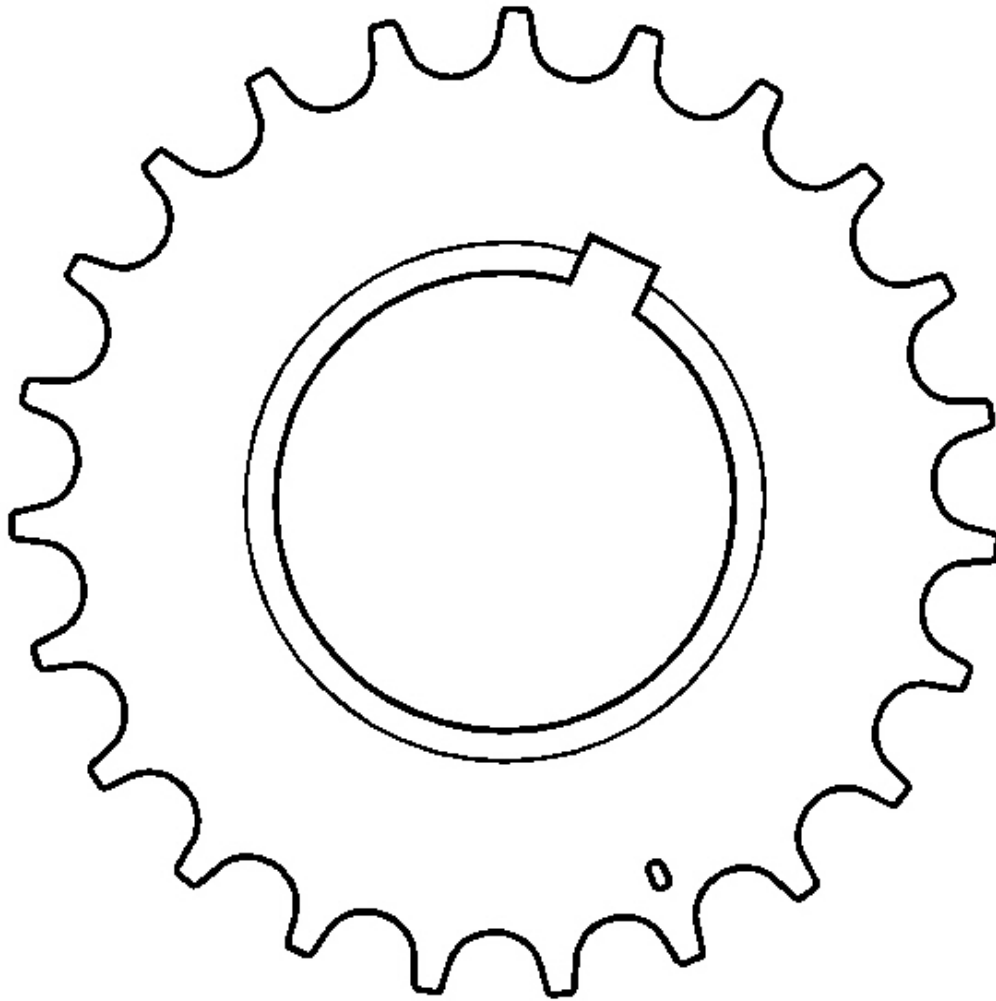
View Of Crankshaft Sprocket Timing Mark In The 5 O'clock Position
